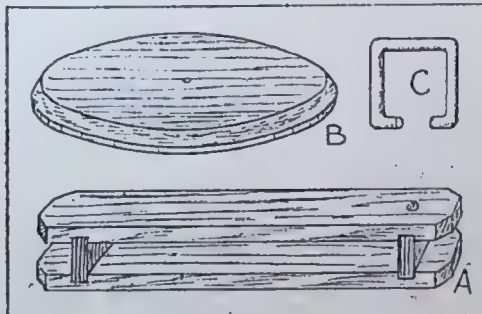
DETAILS OF WHEEL AND FRAME.
